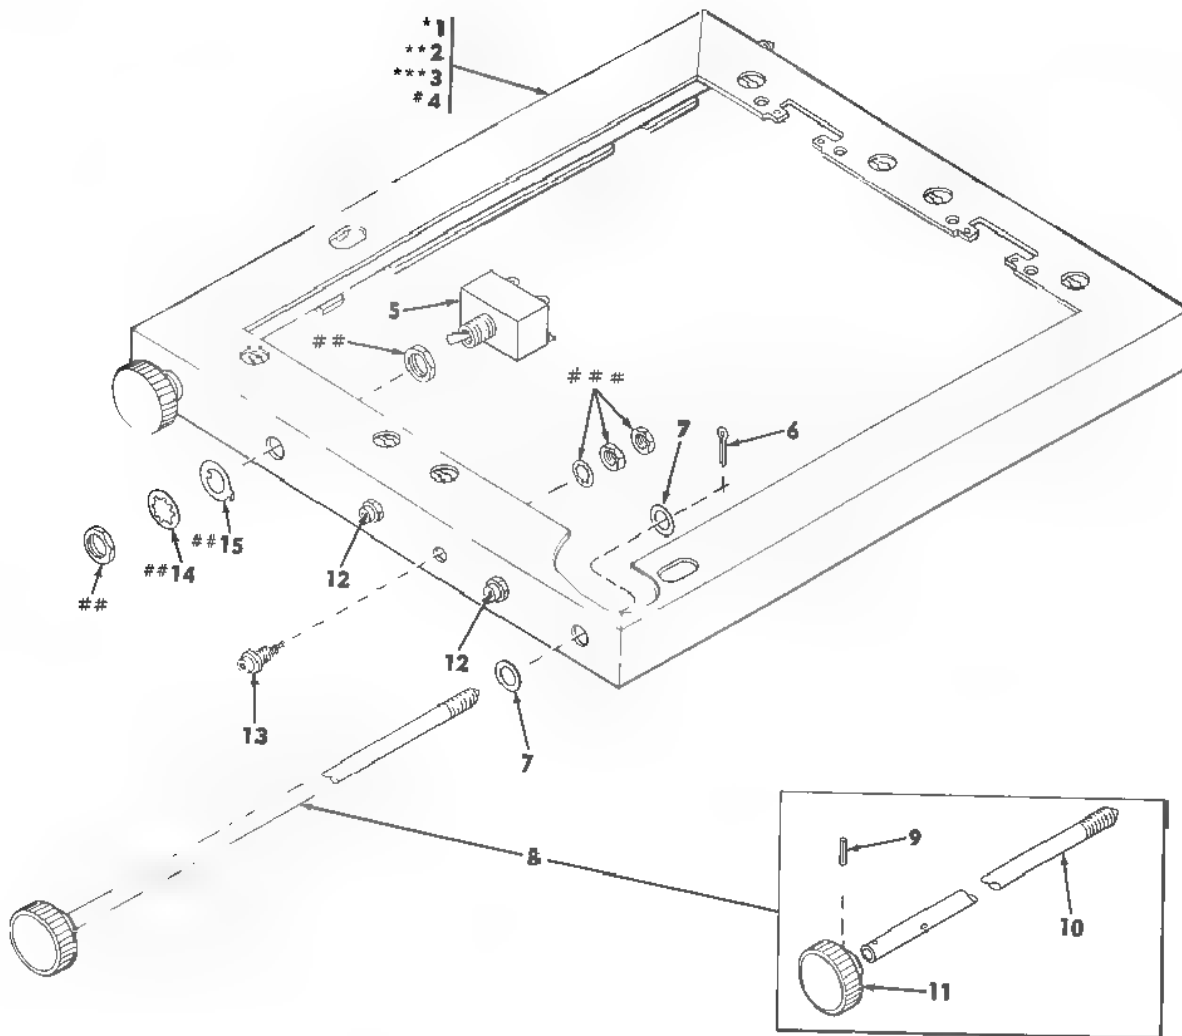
DOOR, PLASTIC FOLDING /8518692/-EXPLODED VIEW
